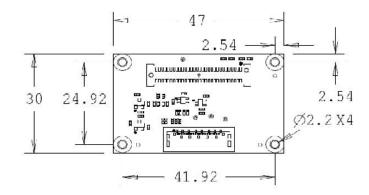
ACC-iMX8M-ADP Board Mechanical Dimensions
